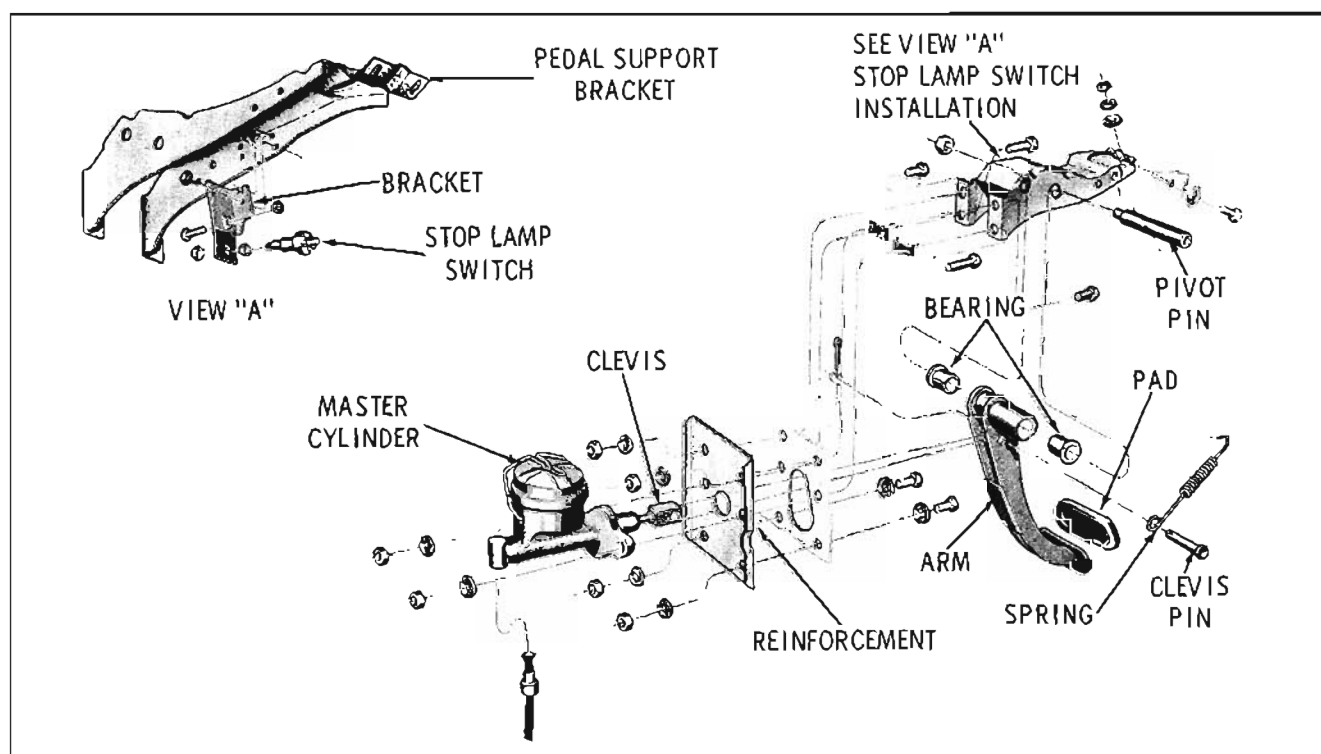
Standard Brake Layout (33, 34, 35, 36, 38 & 39 Series)
